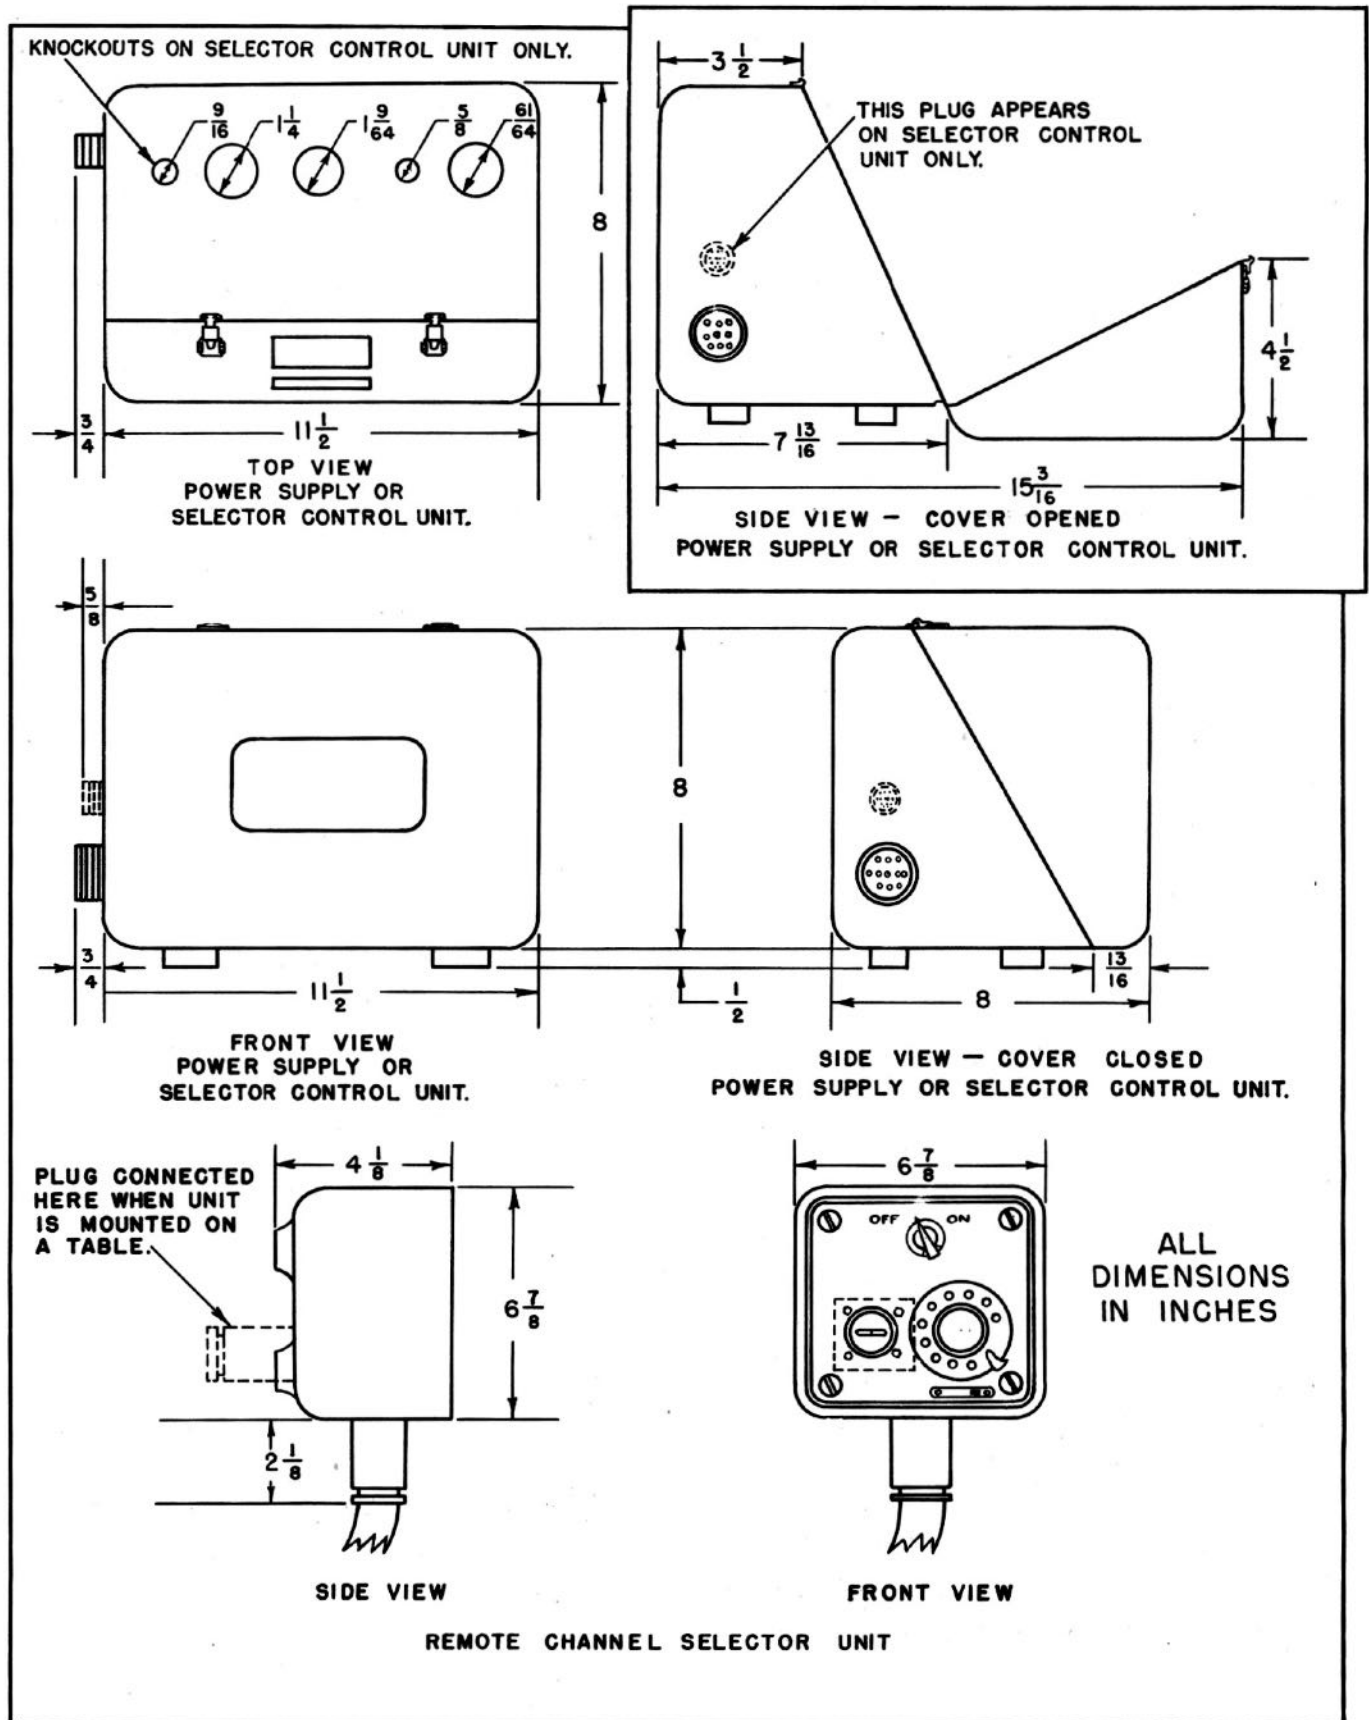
Remote Control Indicator System—Outline Dimensional Drawing
